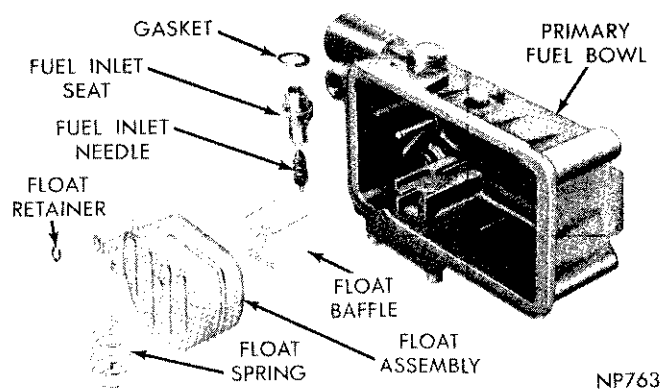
Float, Needle, Seat and Baffle (Exploded View)
